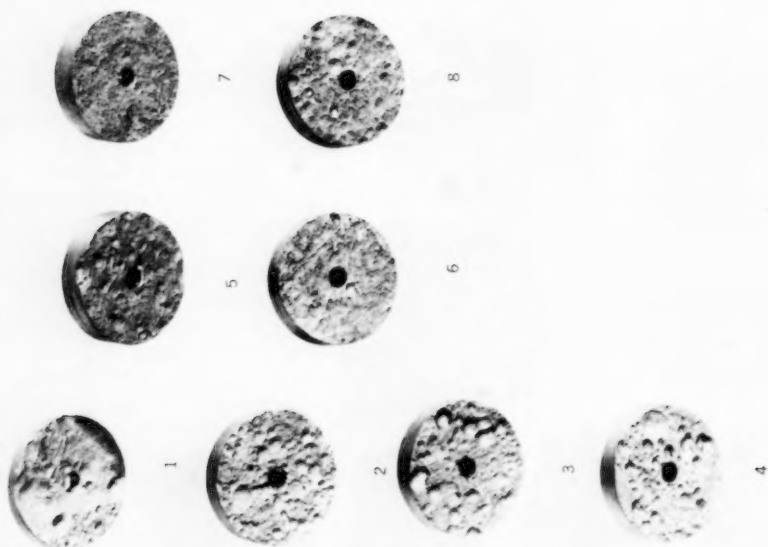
FRONT VIEWS OF FINISHED SAMPLES
